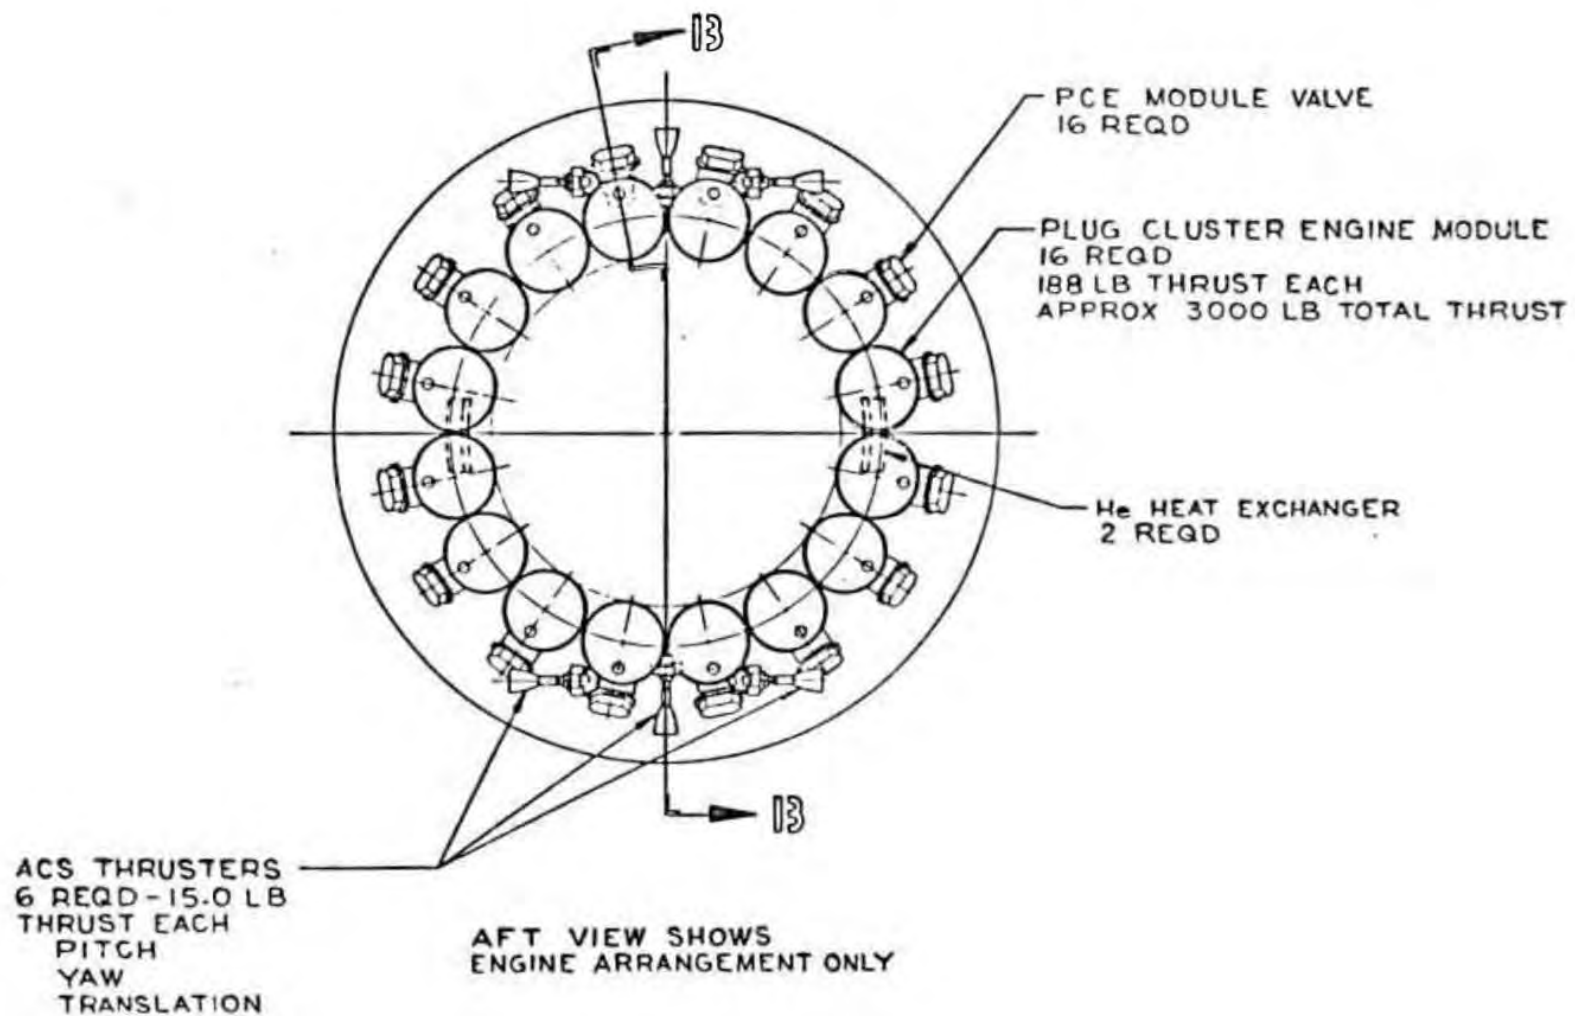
N₂O₄/MMH Plug Cluster Engine (Rear View)
